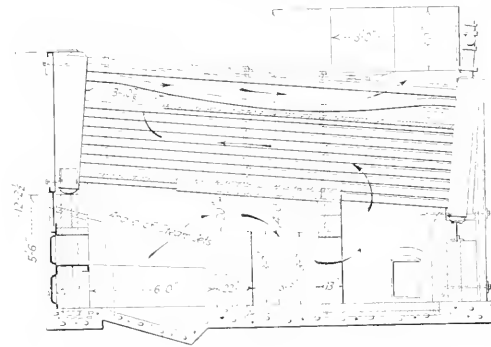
DRUMLESS EDGE MOOR WATER-TUBE BOILER, 215 HP., AND HAND-FIRED FURNACE
